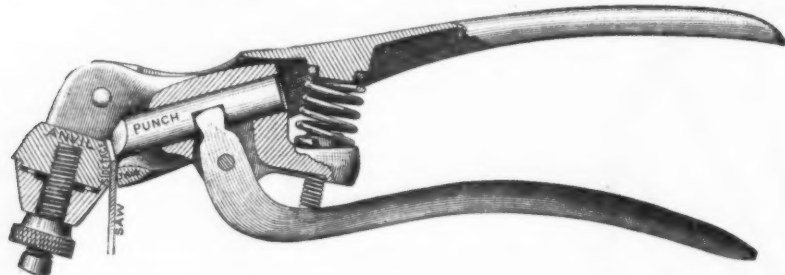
Sectional View, Showing the Manner of Clamping the Tooth Against the Face and Side of the Anvil.
